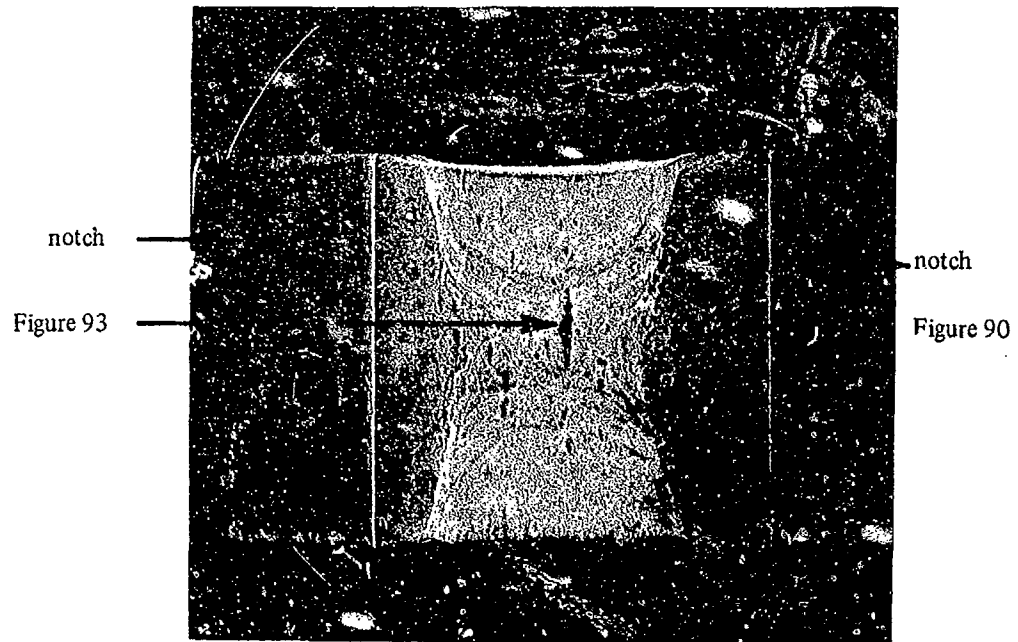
Fracture surface of flat HY-130 fatigue specimen, 8x.
